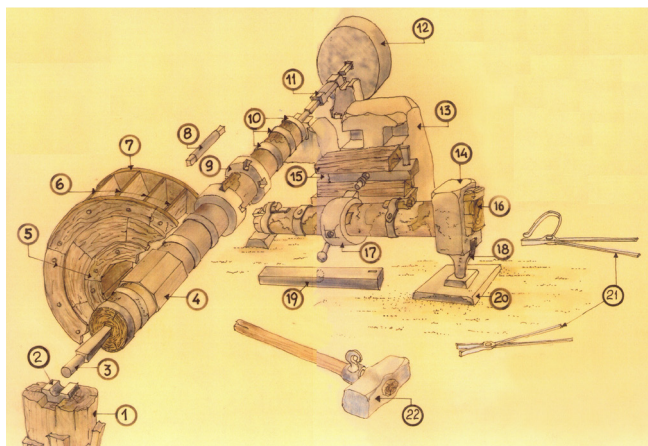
The trip hammer of a thinning or flattening forge at Bienno. This type of hammerhead and tongs is for forging buckets. At the far end of the axle, which is driven by the water wheel, there is a grindstone. Each component of the plant had its own technical name. In the local dialect they are: 1, la cavra; 2, òl runi; 3, la guei; 4, l'erbor; 5, i gaei; 6, i cop; 7, la röda; 8, la pálmola; 9, i garciocc; 10, le ere; 11, la biñhola; 12, la mola; 13, la hoca; 14, òl cò del mai; 15, i primahöi; 16, òl manech del mai; 17, la boga; 18, la boca; 19, òl pal de fer; 20, la mahèta; 21, le tanae; 22, la maha del rampi.
